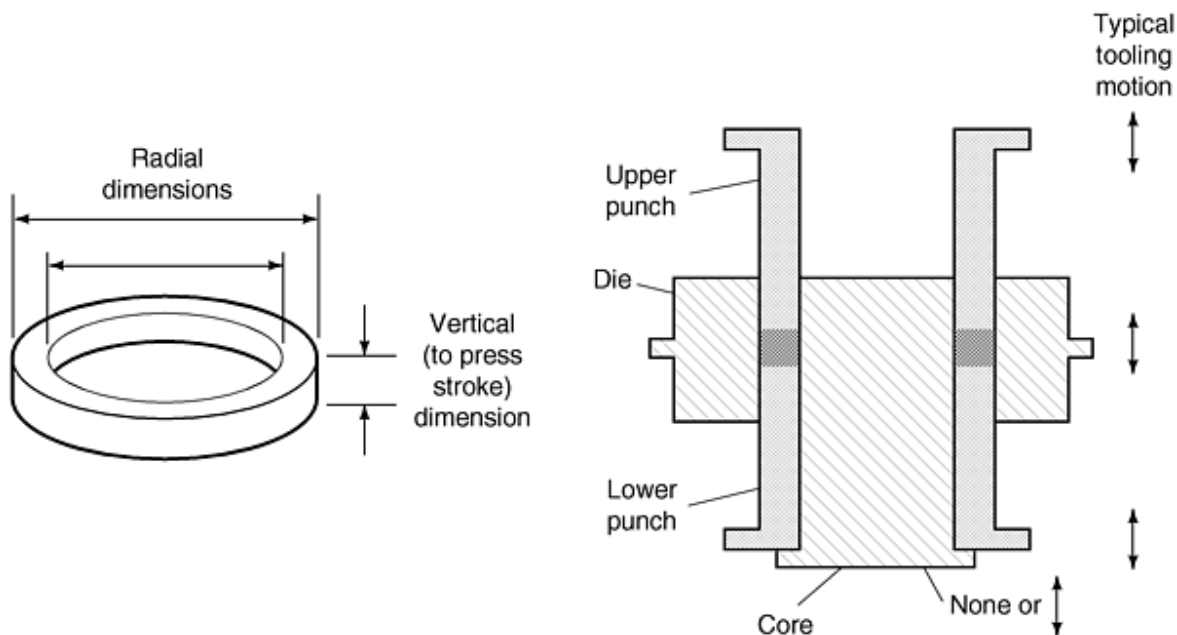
Radial dimensions of part relative to typical die configuration and tool motion
